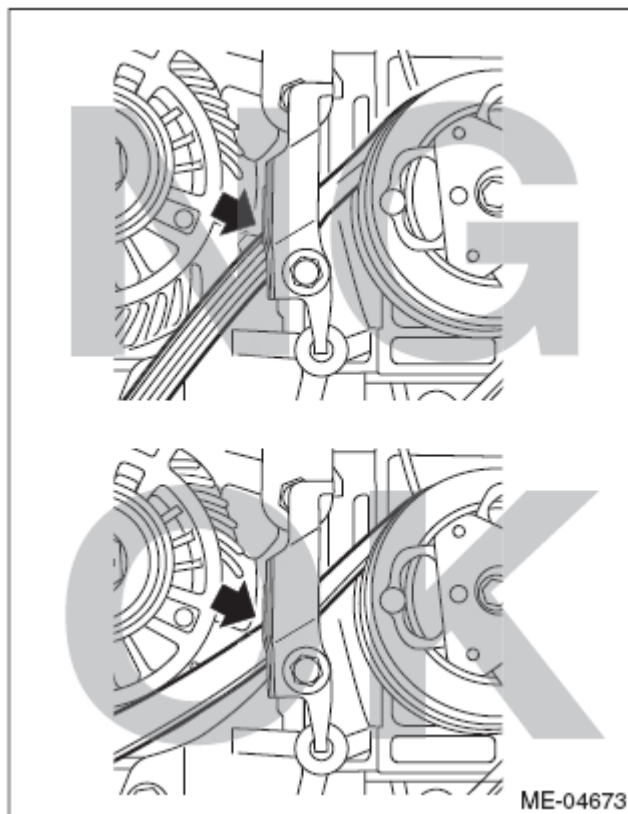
Identifying Proper And Improper Holding Rear Side Belt
